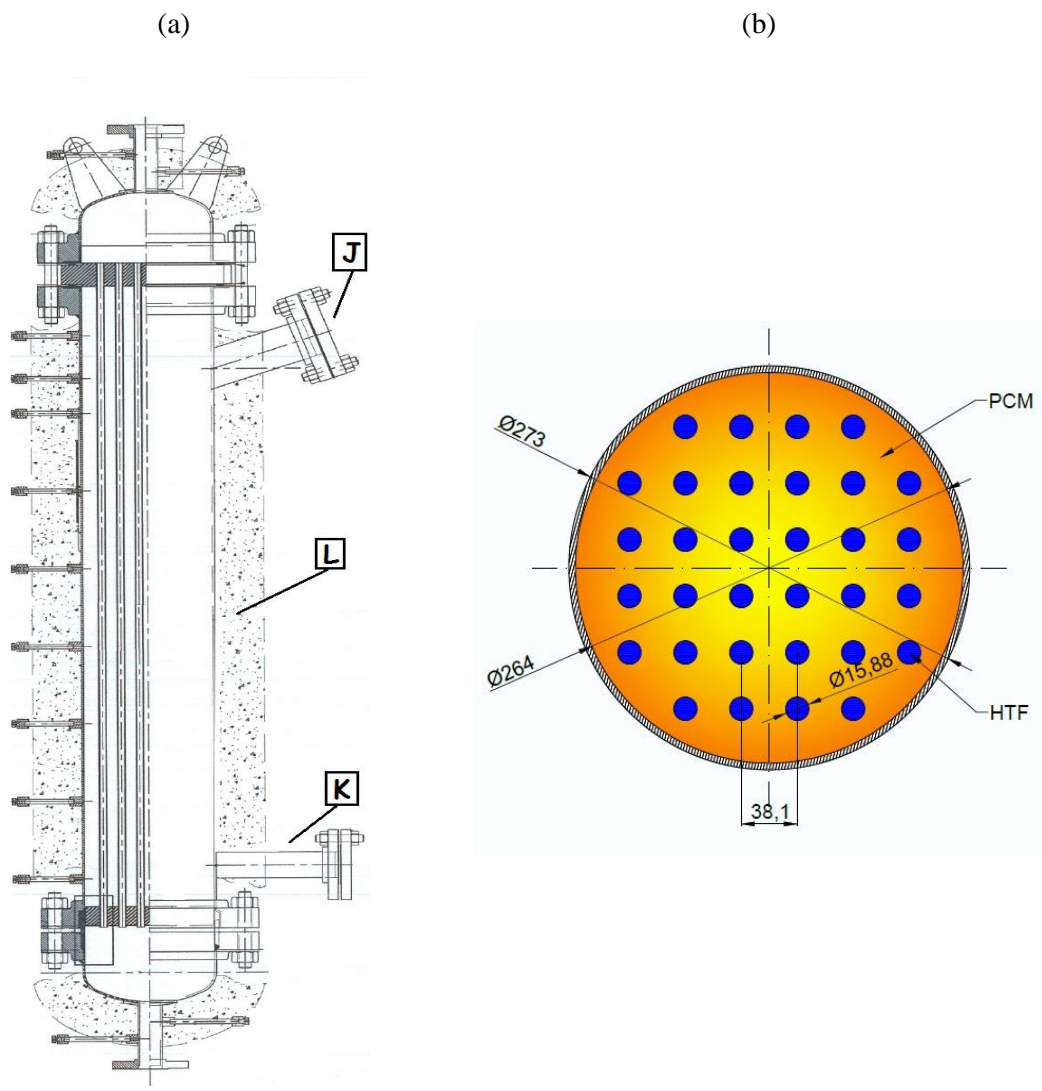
TES layout (a) and tube bundle scheme (b)
